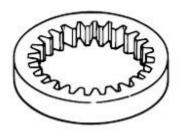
, Internal Gear (Kohara Gear Industry Co., Ltd., 2015)
